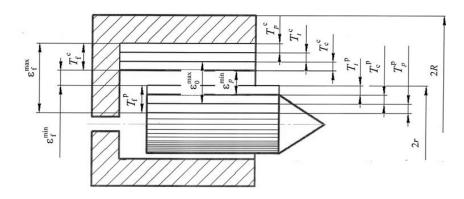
The layout of the tolerances of the piston pair of the axial-piston hydraulic machine
